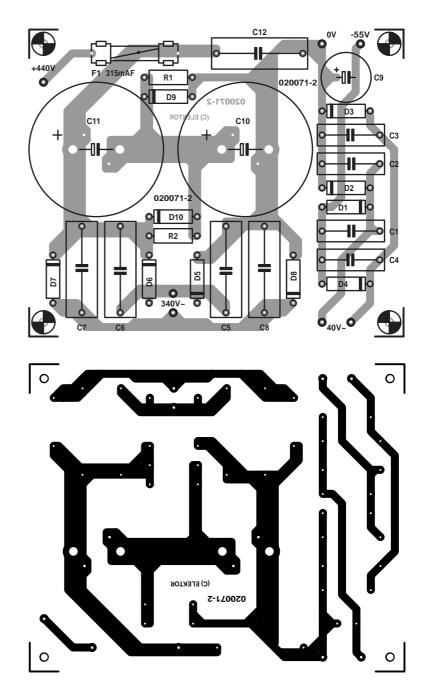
Copper layout and component layout of the printed circuit board for the power supply.
